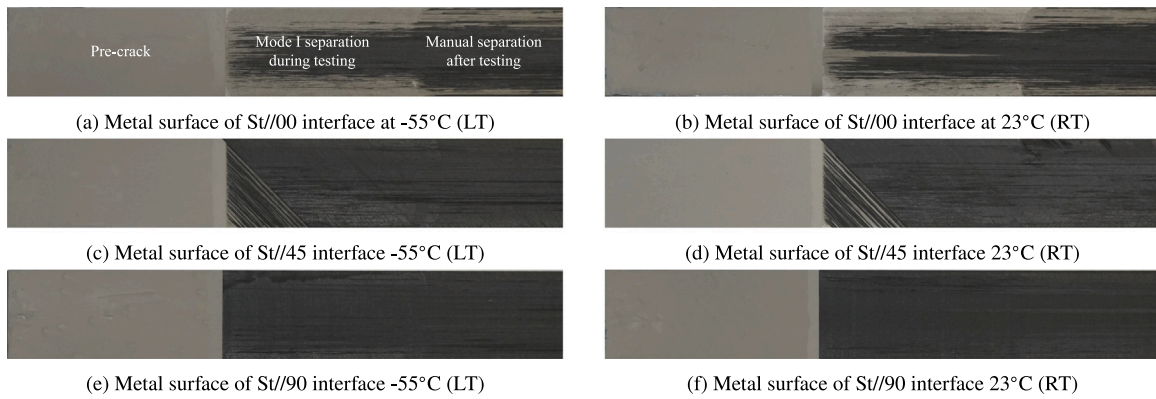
Fracture surfaces of hybrid DCB specimens.
